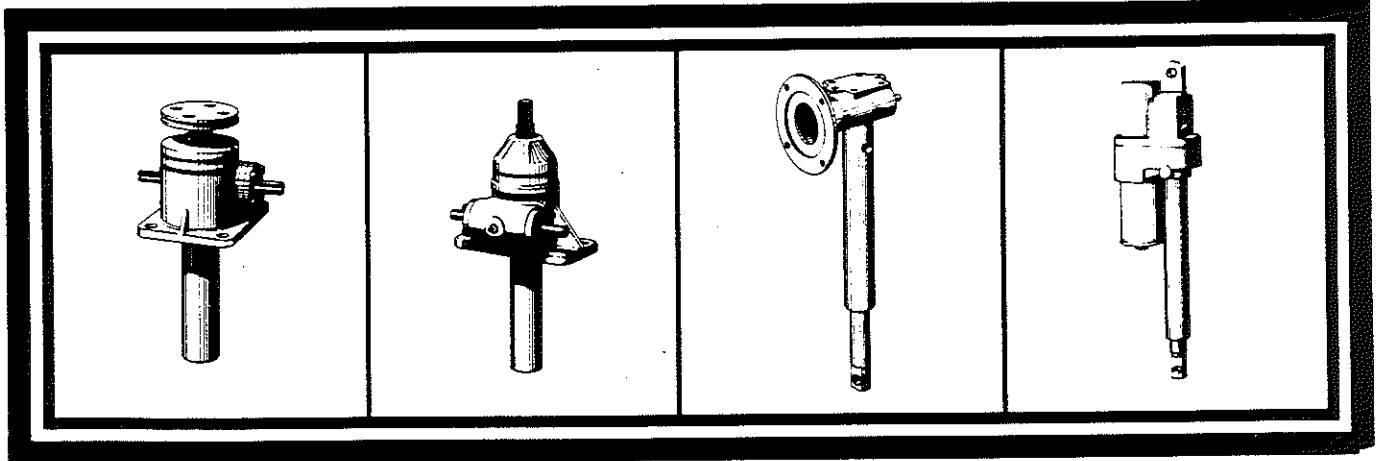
EXPLODED ILLUSTRATION 1800, 9000, 4800 and 9400 SERIES MACHINE SCREW ACTUATORS.
